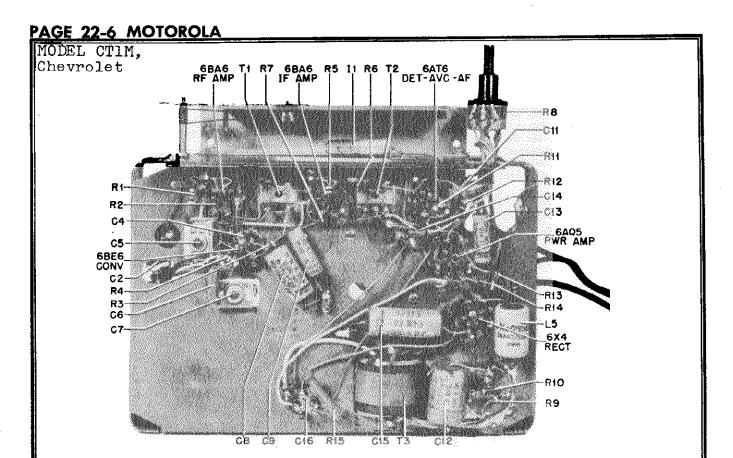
BOTTOM VIEW OF CHASSIS.
